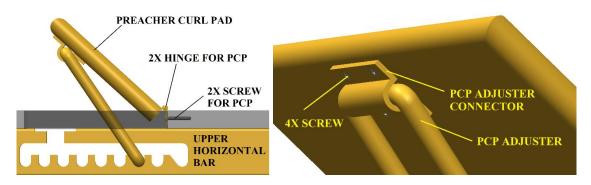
Side view and isometric bottom view of Arm Anchor Subsystem
